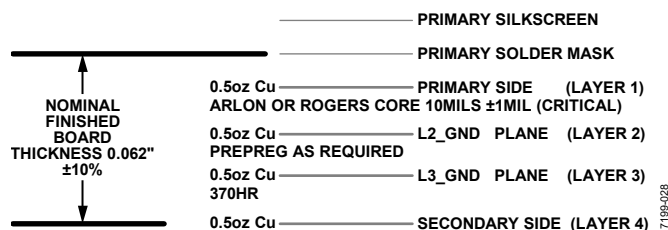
The Cross-Sectional View of the ADMV8420-EVALZ PCB Layers
